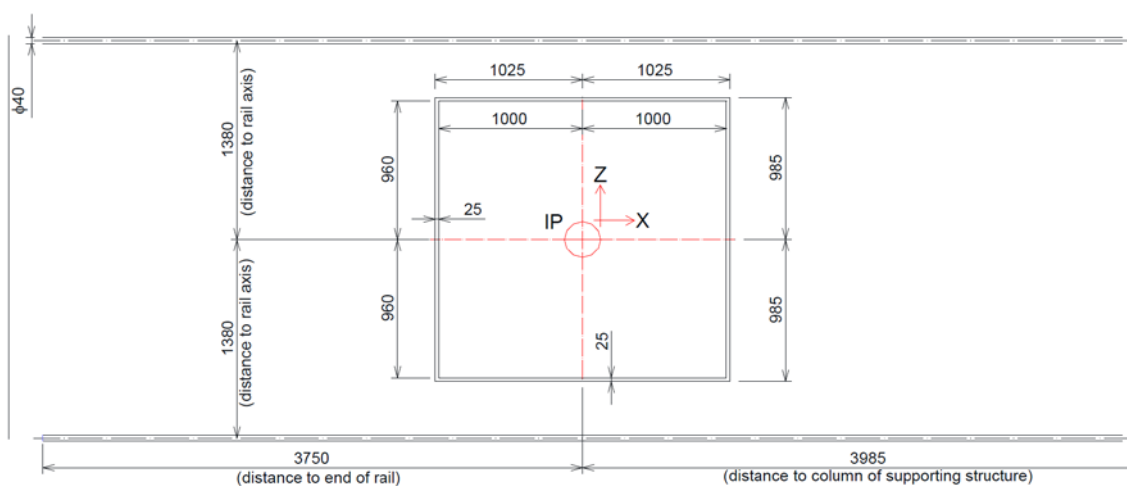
UT box front view with dimensions and mounting rails [27]
